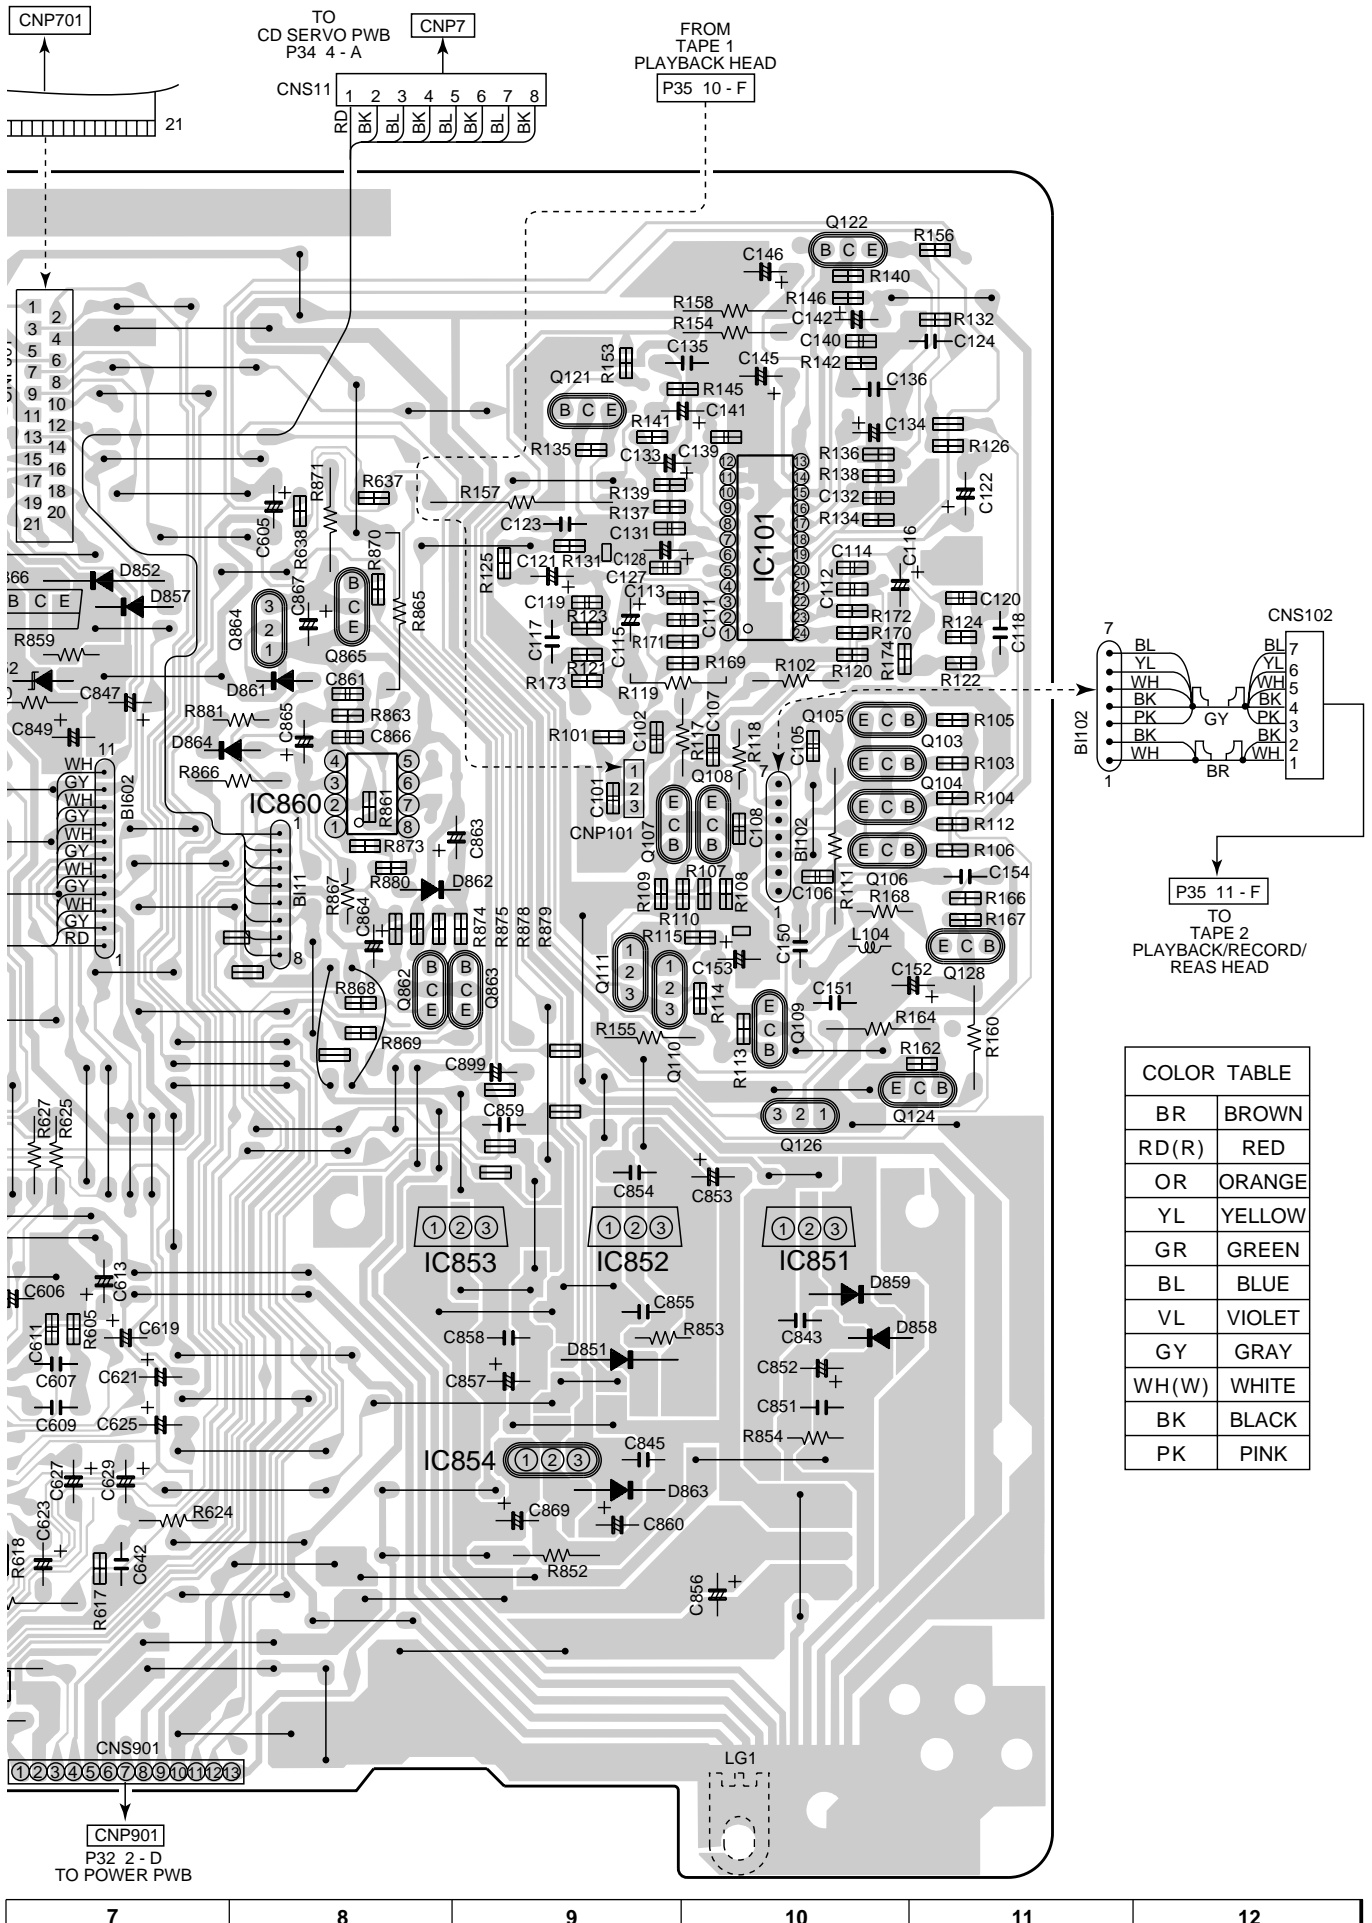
WIRING SIDE OF P.W.BOARD (3/9)
